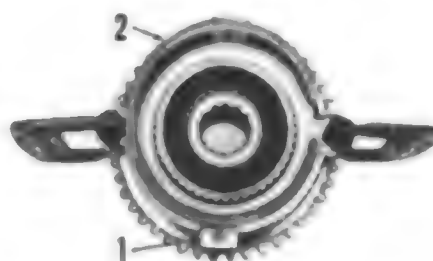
View showing "C" clamps used to compress the backing plate ring and springs for removal of snap ring.
